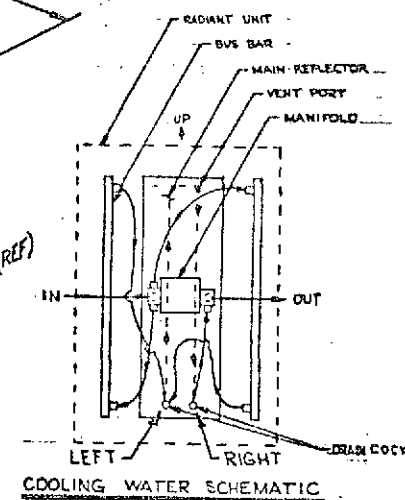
RADIANT UNIT ASSEMBLY, SIDE SECTION
